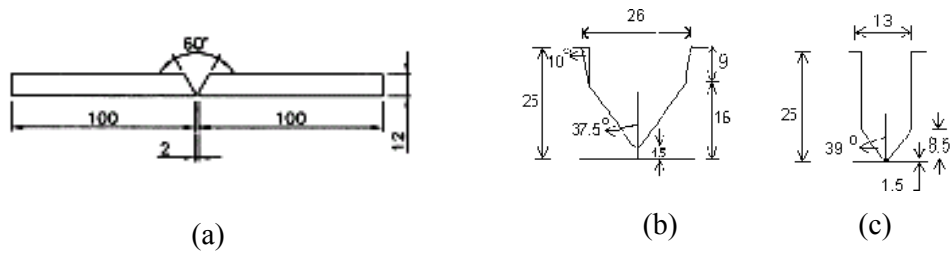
a) Single V groove design for 10mm and 12mm thick mild steel plate's
